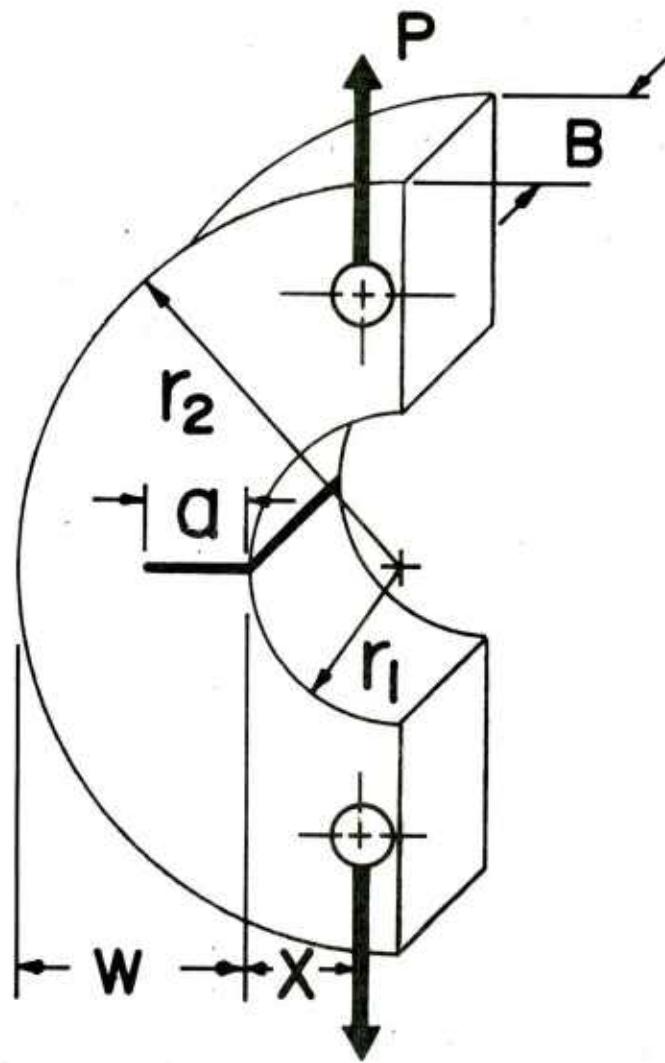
The C-Shaped Specimen, Indicating Geometric Parameters
